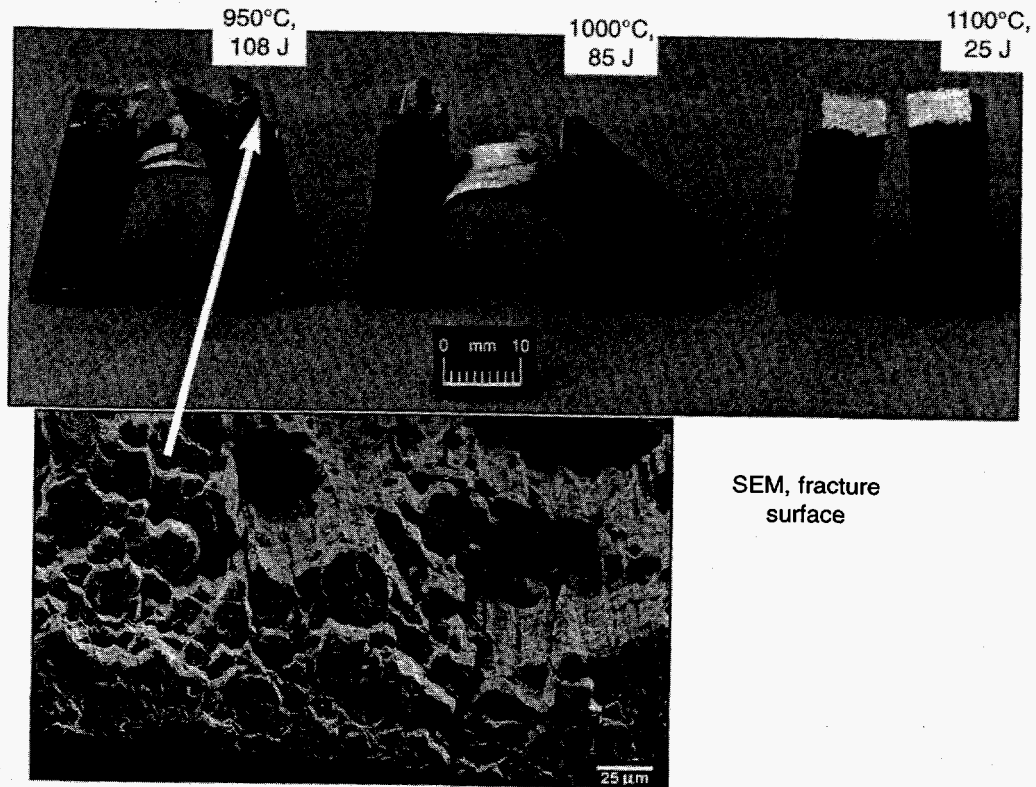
Macro fractography of P/M FeAl (FA-385) Charpy impact-toughness specimens, with SEM fracture surface analysis of the material extruded at 950°C.
